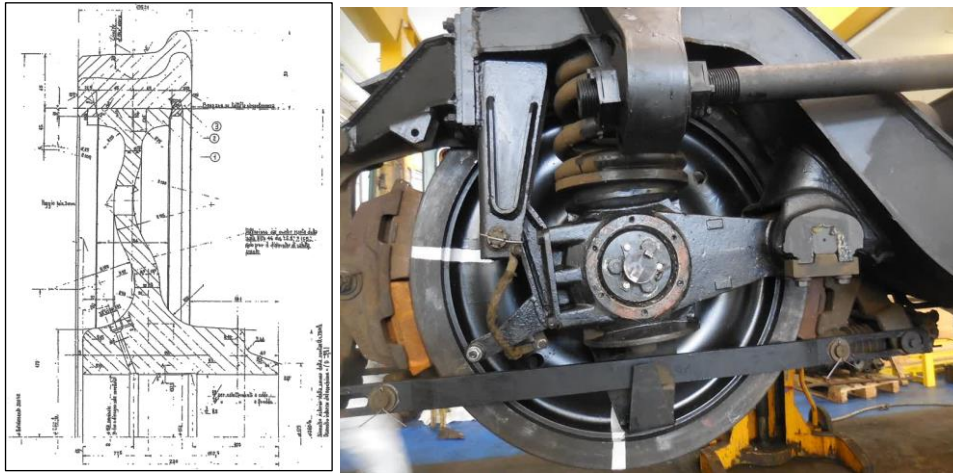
Left: Original drawing of the tyred wheel for ALn668 dated 1957. Right: Side view of the wheelset mounted on the bogie at the depot of Iseo.
